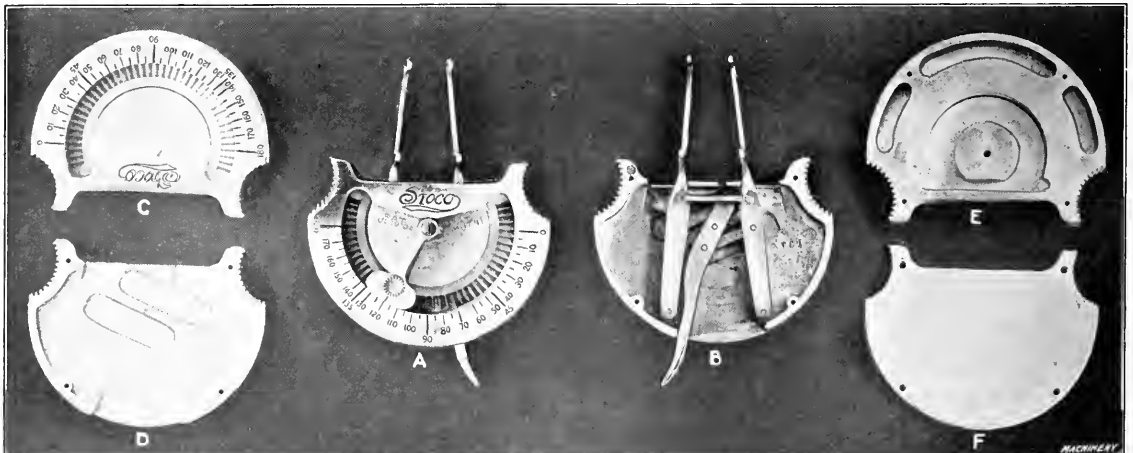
"Stoco" Inclinometer with Face and Back Views of its Parts
